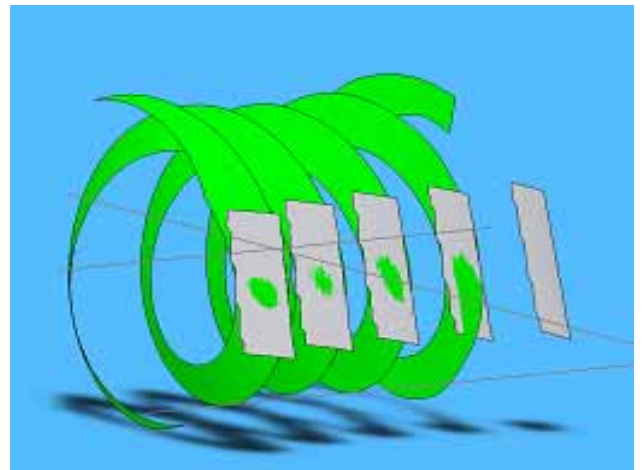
Tooth Contact Analysis of Modified Hindley Worm and Involutes Helical Wheel by 3D/CAD
